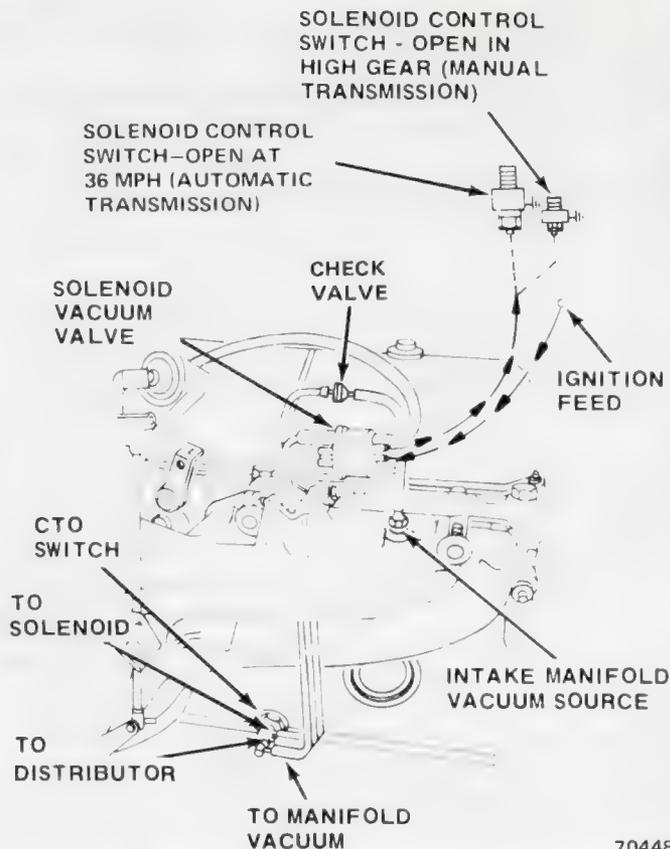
G-21 Vacuum Spark Control Check Valve—Six-Cylinder
